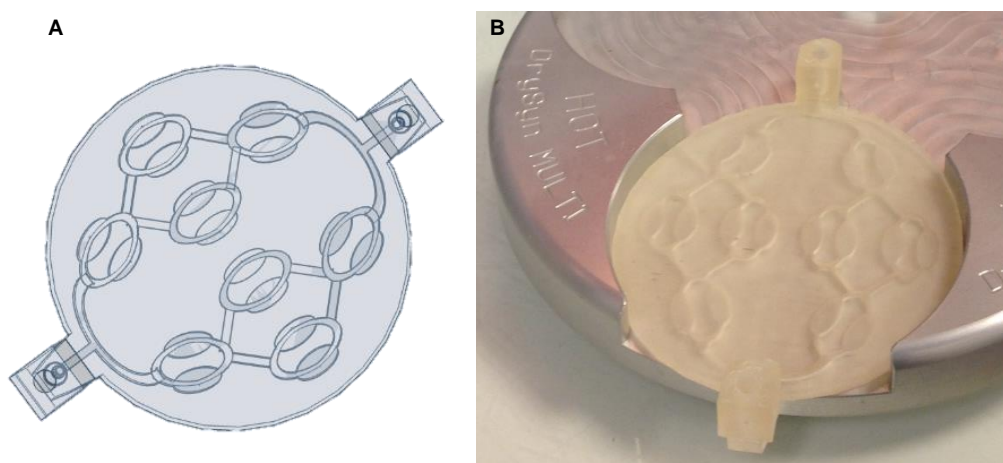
A) CAD drawing of circular hotplate reactor design 1; B) Printed circular hotplate reactor design 1 and placed in DrySyn.
